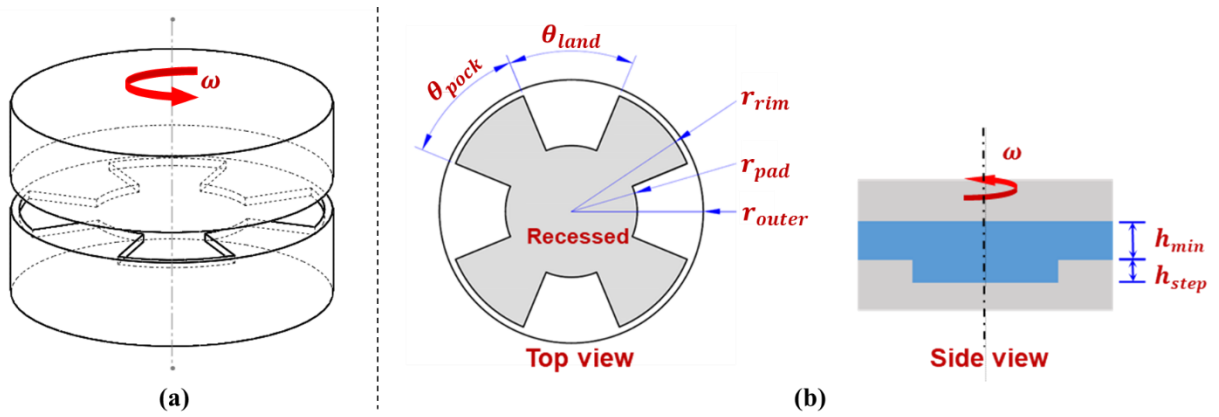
(a) Parallel thrust bearing consisting of an evenly recessed pocket pattern on the stator and flat rotor. (b) Shape and pocket parameters.
